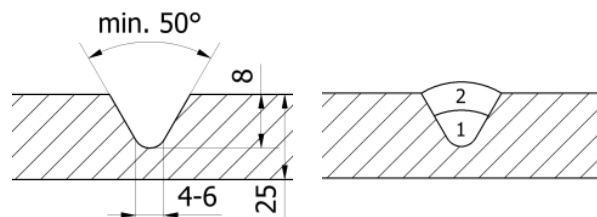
Geometry of a welding joint and a method of weld beads position
